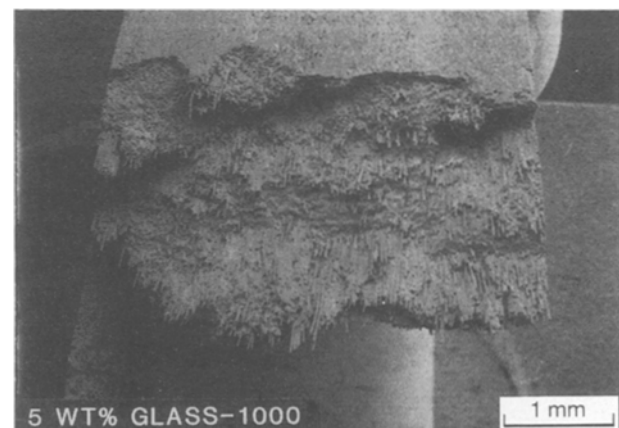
Fracture surface of 5 wt % glass-doped matrix; composite tested at 1000 °C in air.
